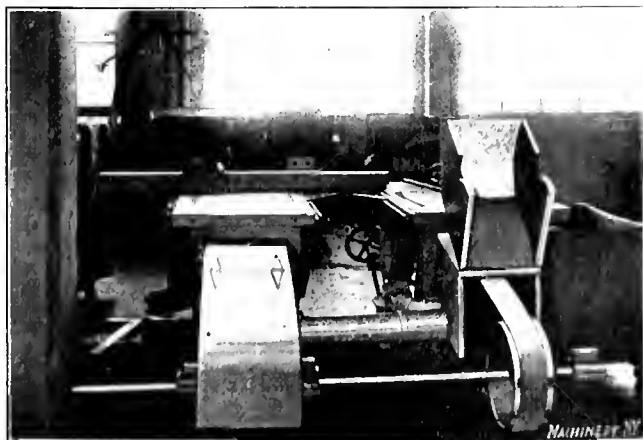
Bolt and Pulley Covers in the Wood Shop
